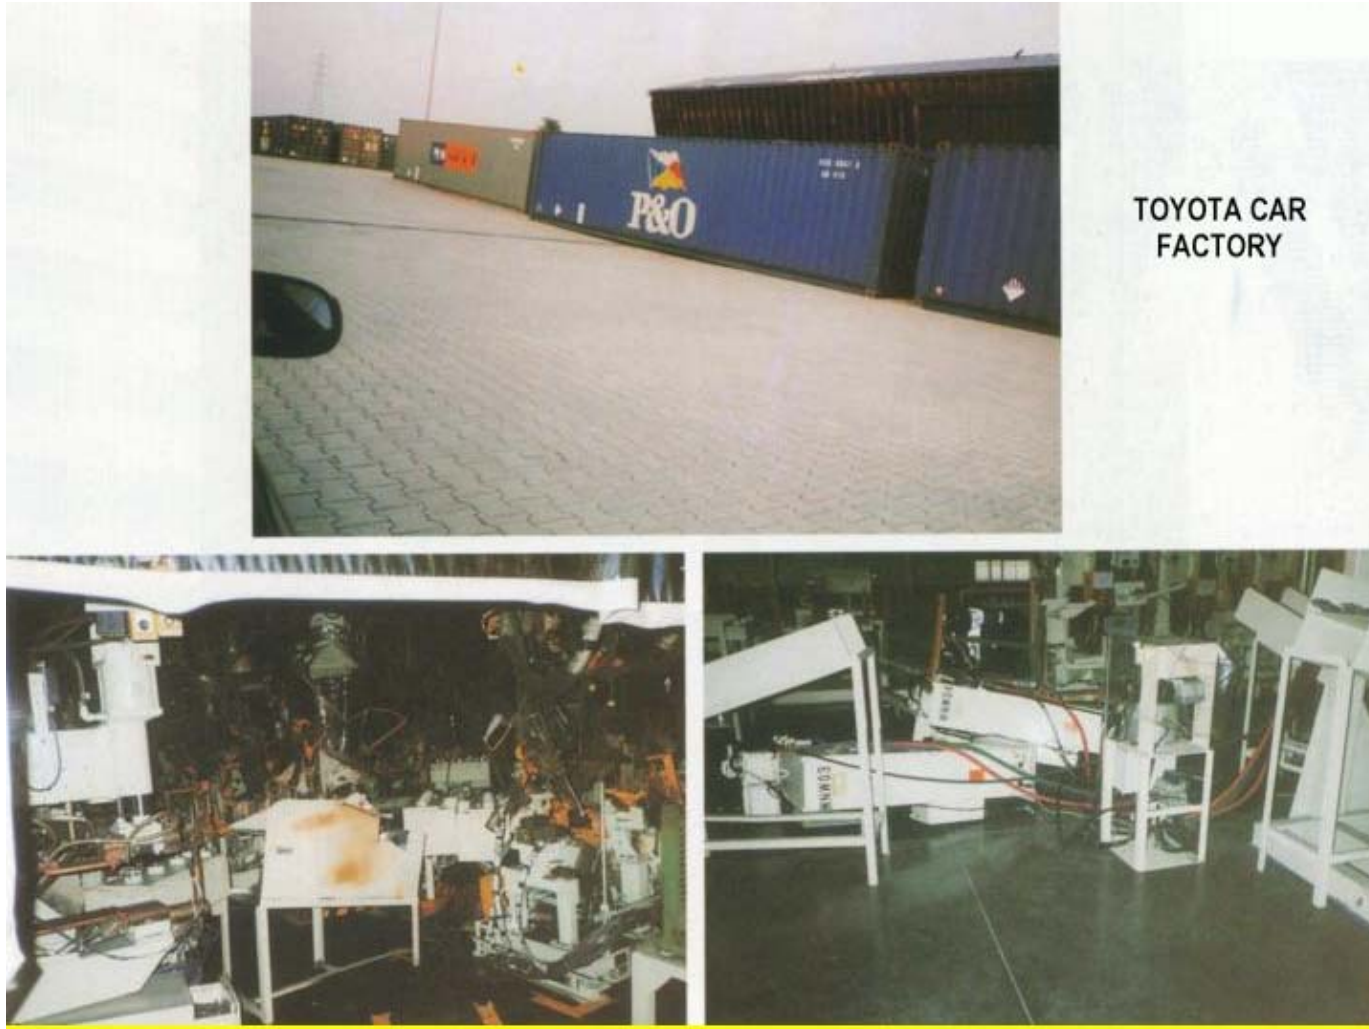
Equipment and storage damage at Toyota Car Factory (Afte Milli-Re).
